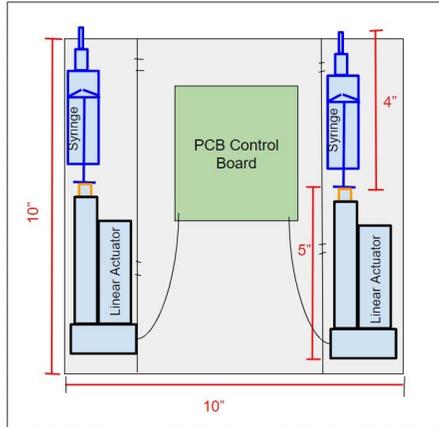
A top view of the Linear Actuator design with dimensions labeled in inches
